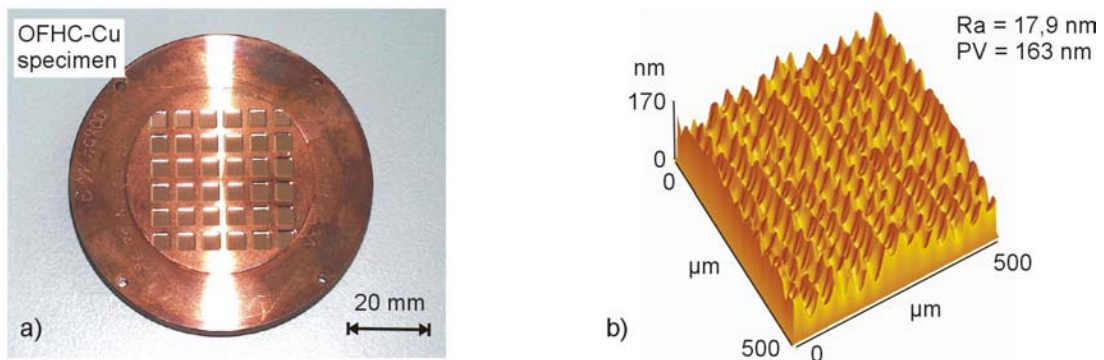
a) 6×6 matrix machined by ball-end milling in OFHC-Cu with different machining parameters. b) WLI-image of typical ball-end milled OFHC-Cu surface.
